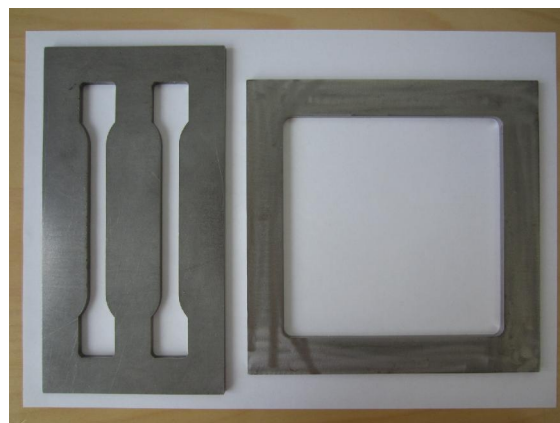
Moulding frames (placed on an A4-sized paper sheet)
